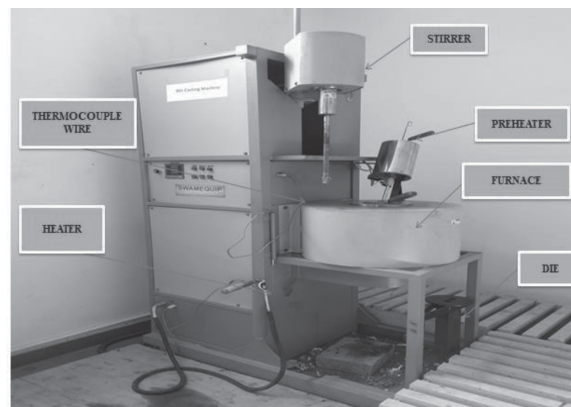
Bottom tapping stir casting machine Setup at Anand ICE, Jaipur
